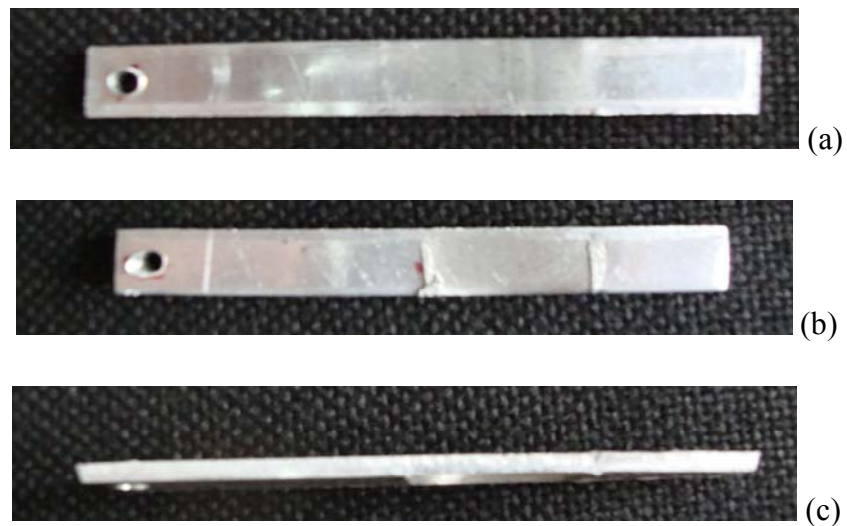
Fatigue sample of friction stir weld, a- Bottom surface of weld region, b- Top surface of weld region, c- Side view
